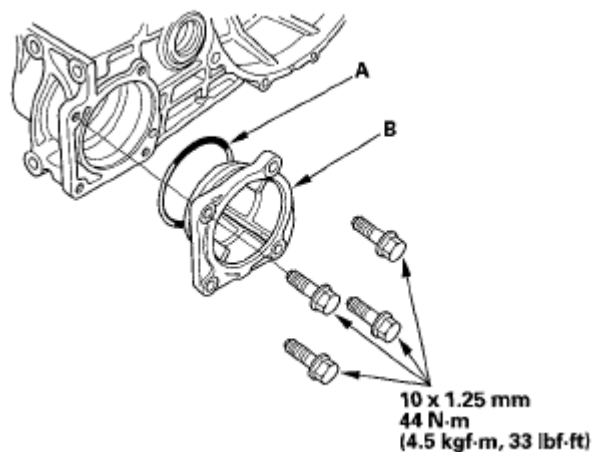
Identifying O-Ring And Side Cover With Torque Specification
